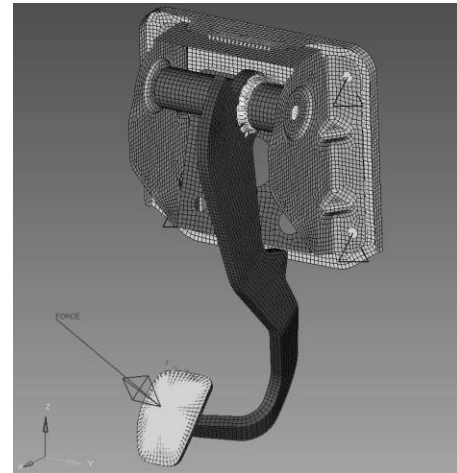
Finite Element Model & Boundary Conditions on Clutch Pedal Assembly and Type of Force Execution.
